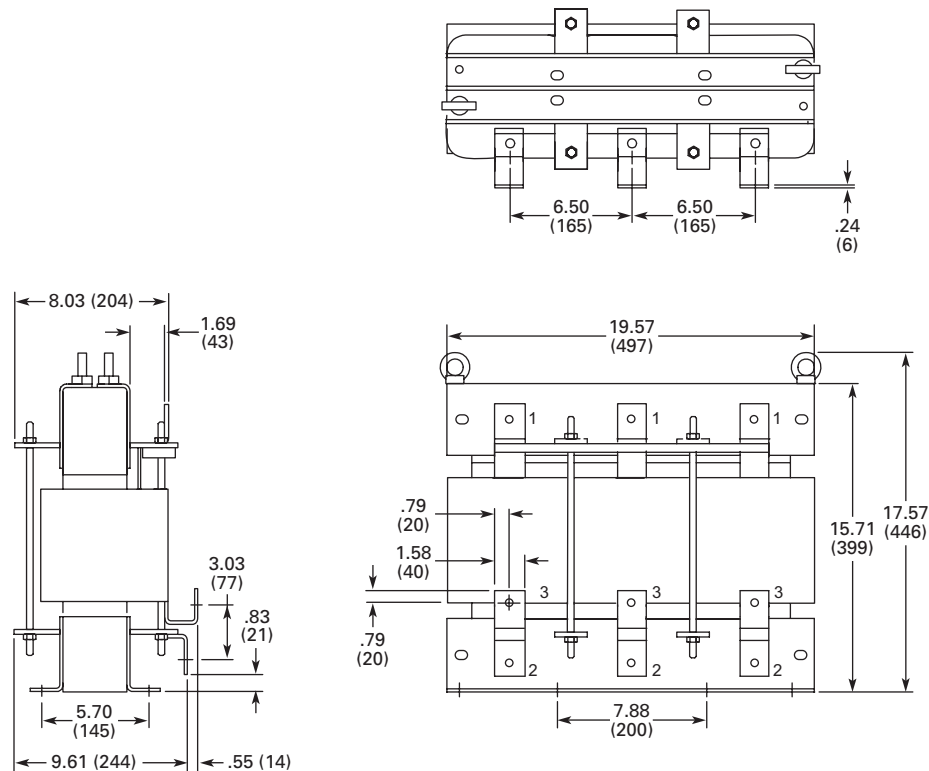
Dimensions of AC Choke CHK0520 in Inches (mm)
